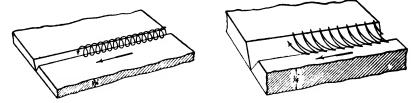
Circular Motion of Blowpipe for Welding Light Sections
